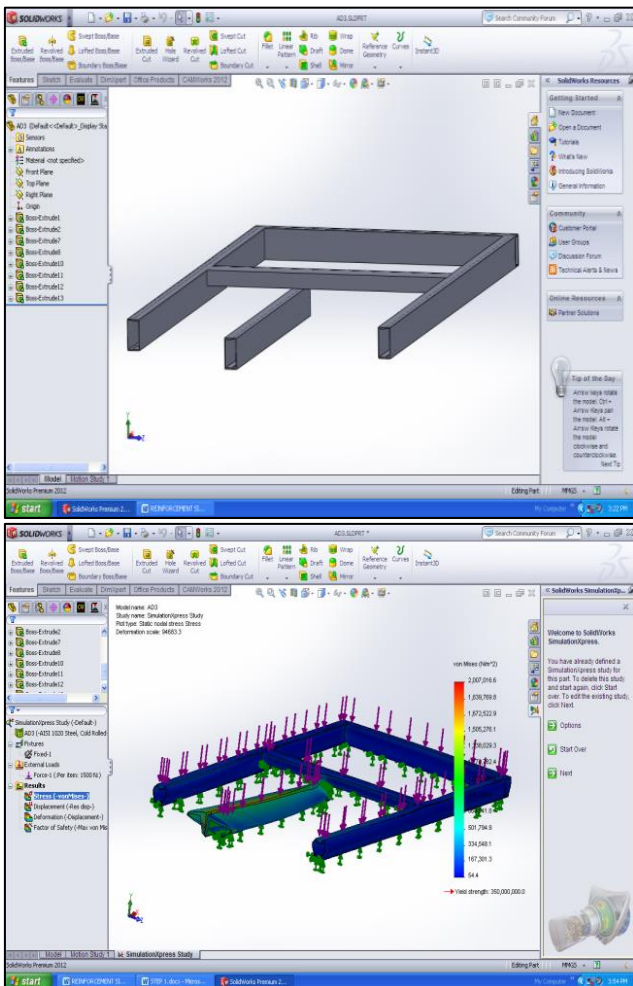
& 3: Analysis on Existing Design (Reinforcement Section)
